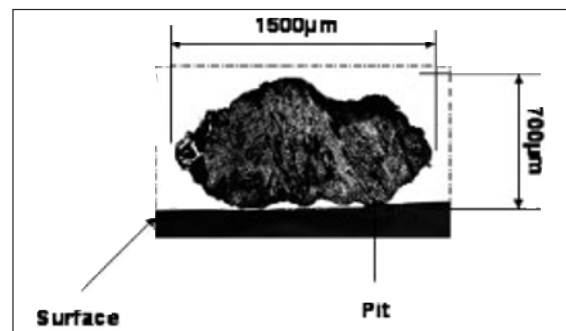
Severe covered pitting corrosion on overlay [6]
